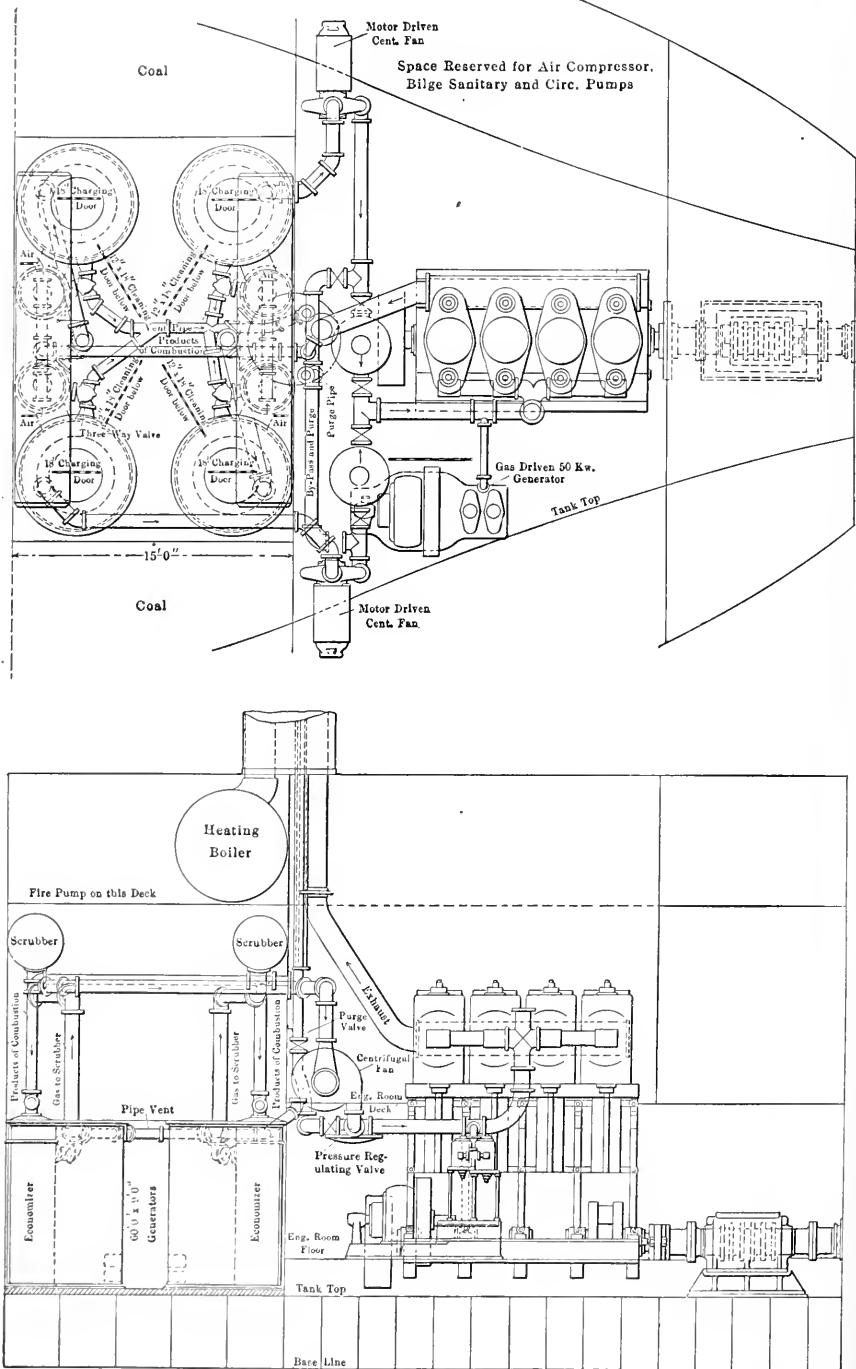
PLAN AND ELEVATION OF PROPOSED FOUR-GENERATOR MARINE PRODUCER PLANT
